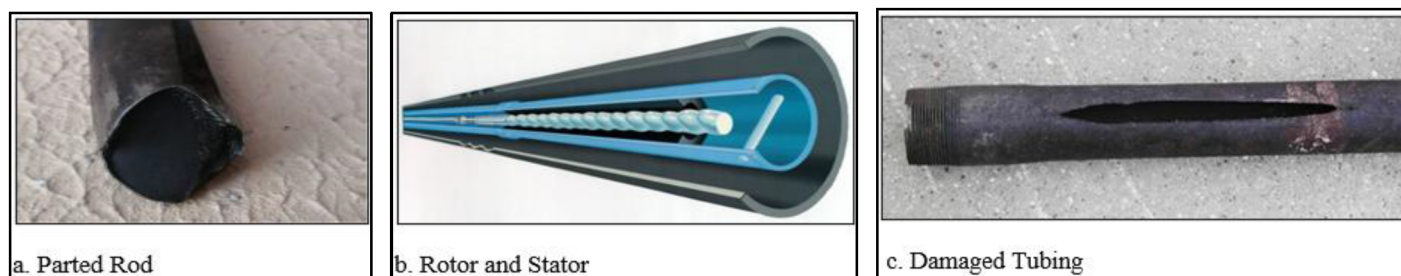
Parted Rod, Rotor and Stator, Damaged Tubing
